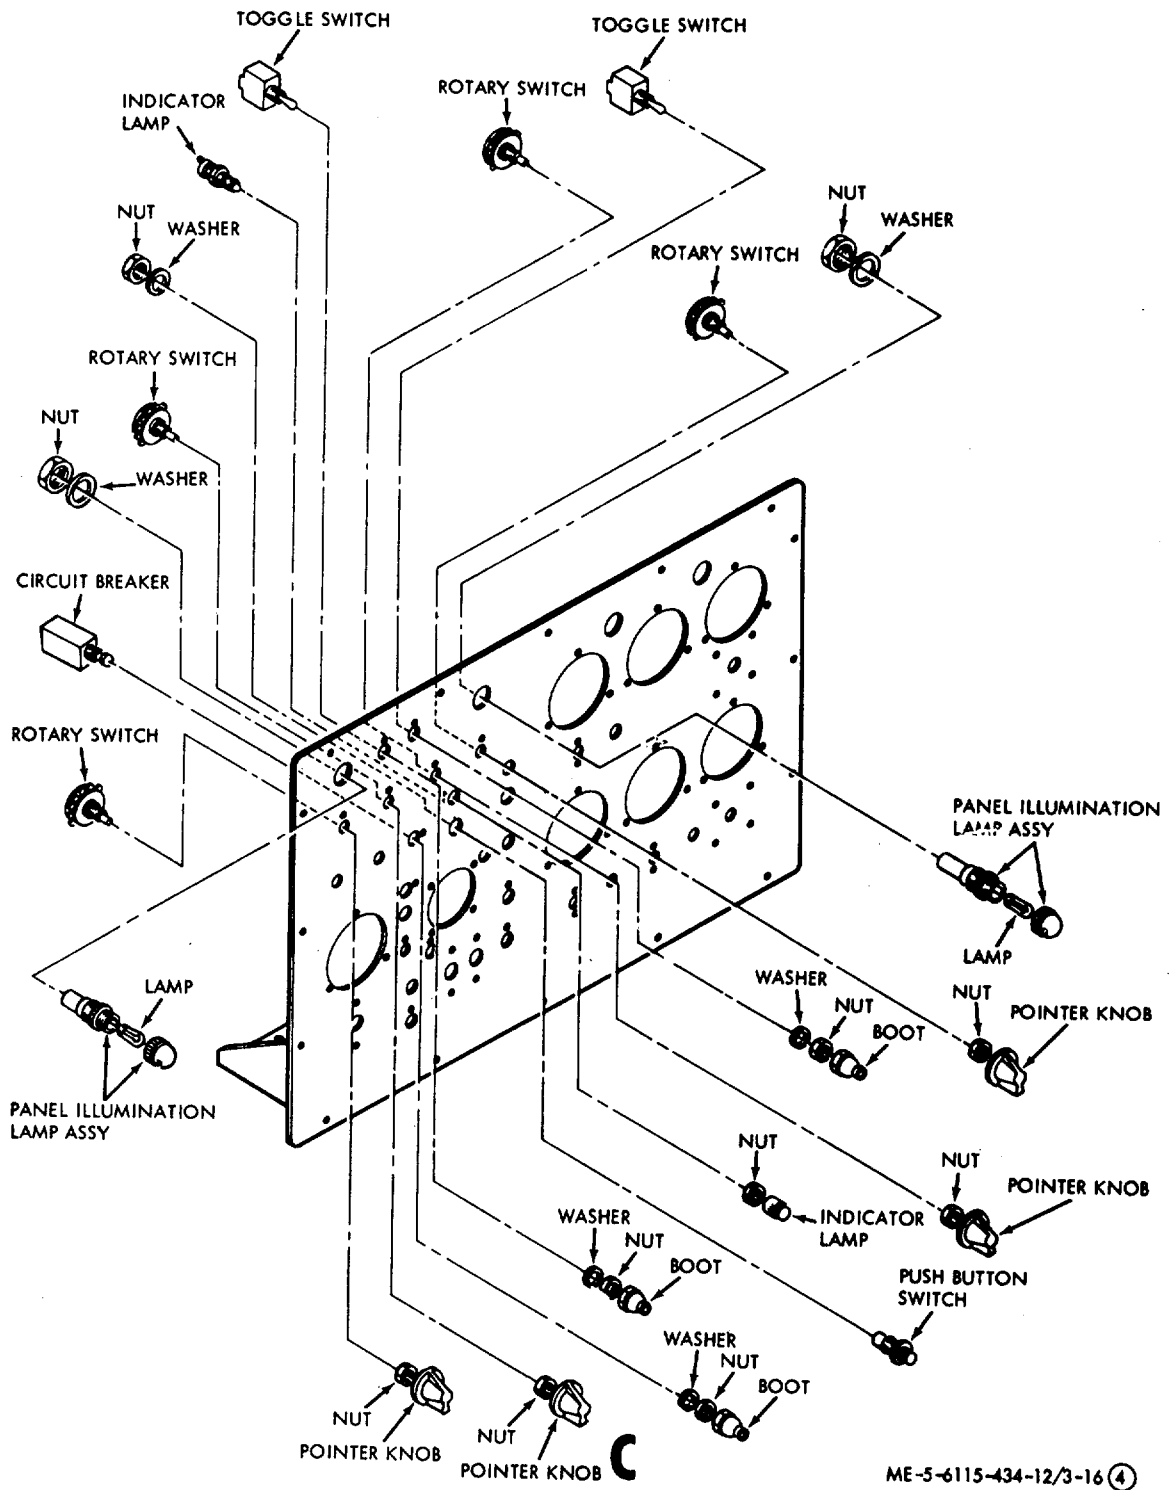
Instrument panel assembly component replacement (Sheet 3 of 4).
